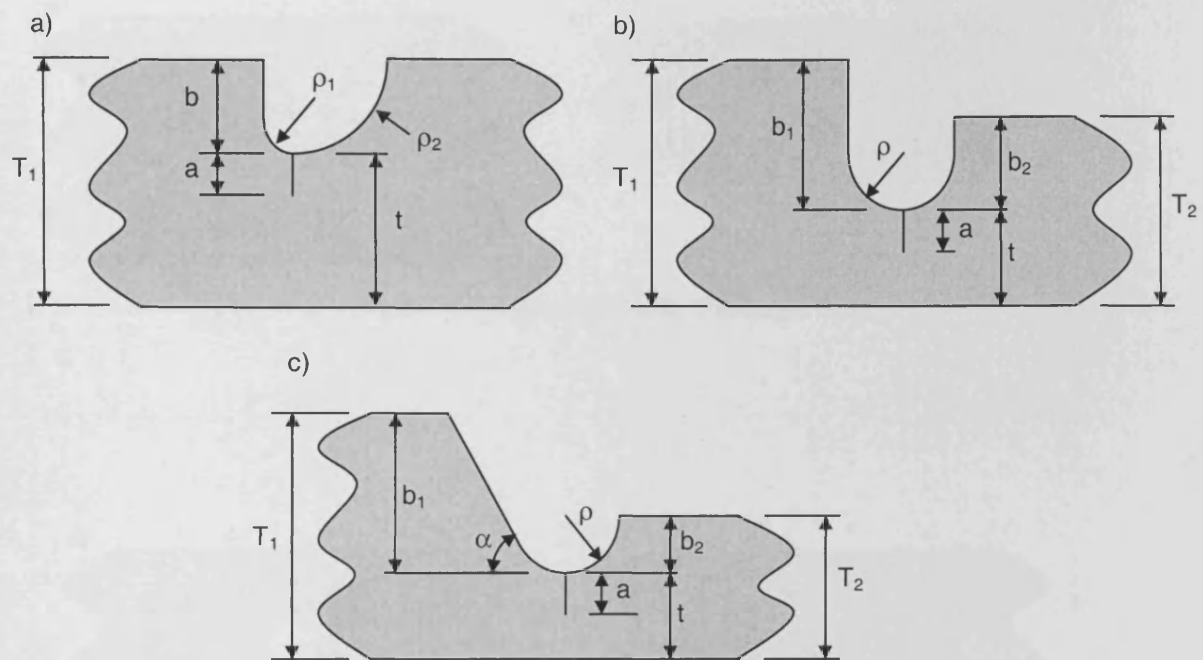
Compound Notched Geometries Containing Edge Cracks
